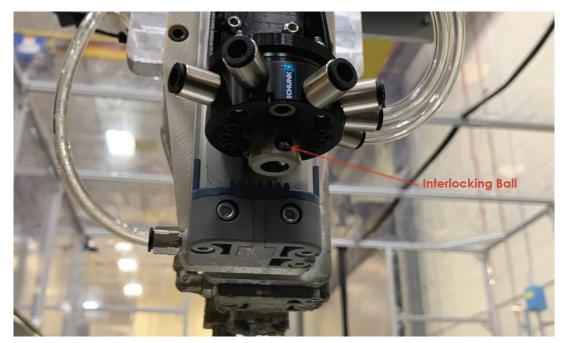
Close-up of the interlocking ball that locks the male fixture to the mating female fixture
